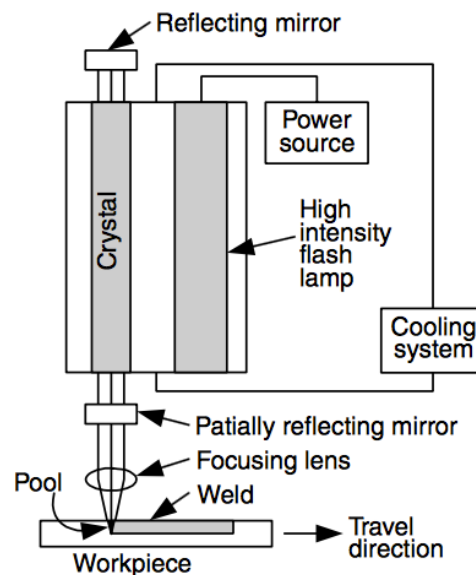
A laser beam welding process (Kou, 2003, p. 30)
